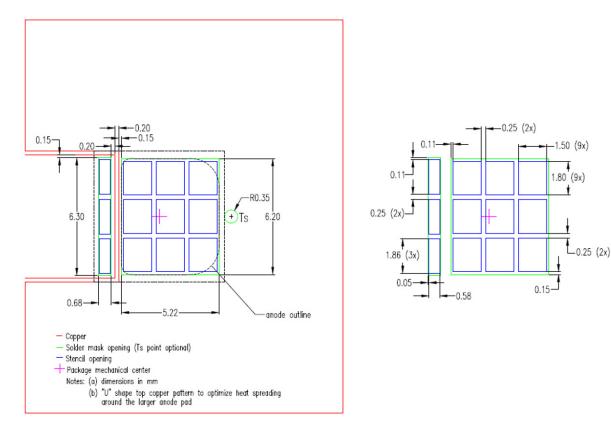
Recommended PCB footprint showing solder mask and stencil opening for LUXEON 7070. Dimensions are in mm.
